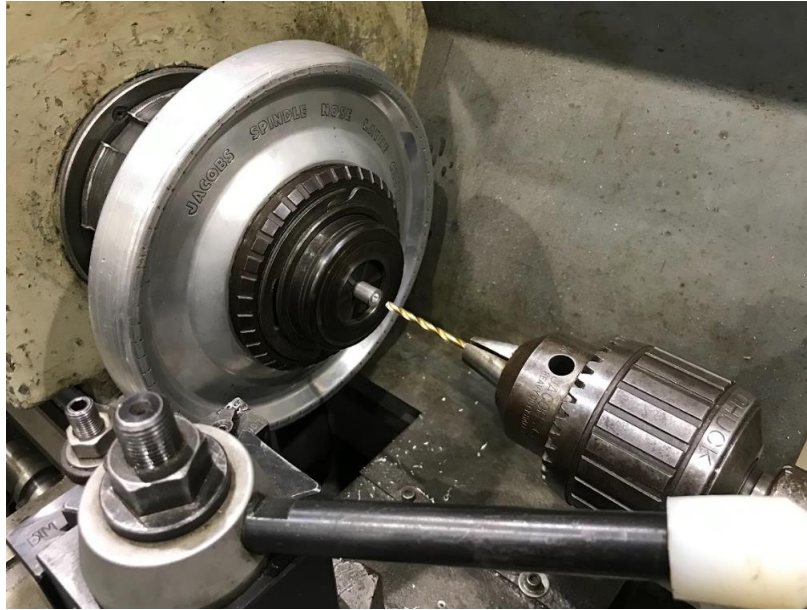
Drilling the hole for the weapon support brace using a lathe
